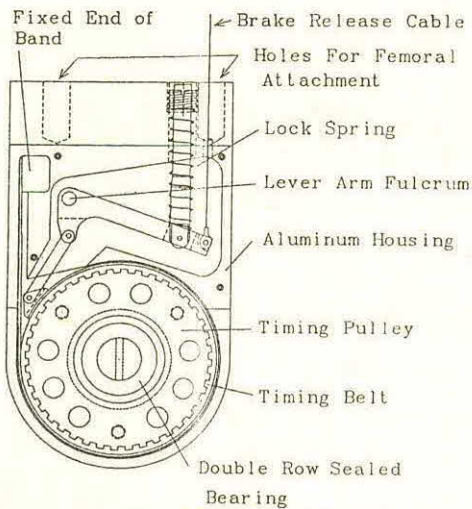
Knee joint assembly with lever arm cover and tibial attachment removed.
